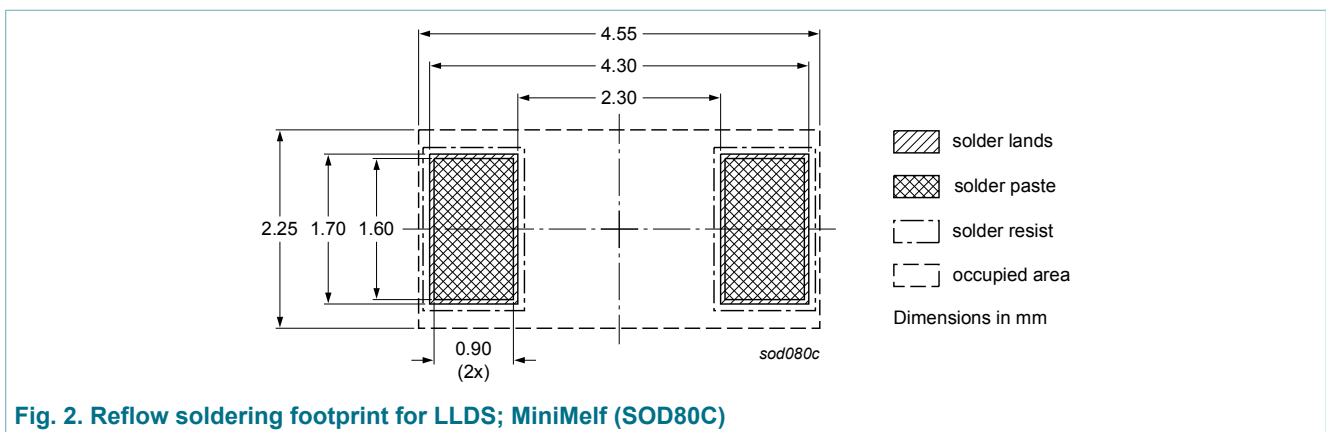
Reflow soldering footprint for LLDS; MiniMelf (SOD80C)
